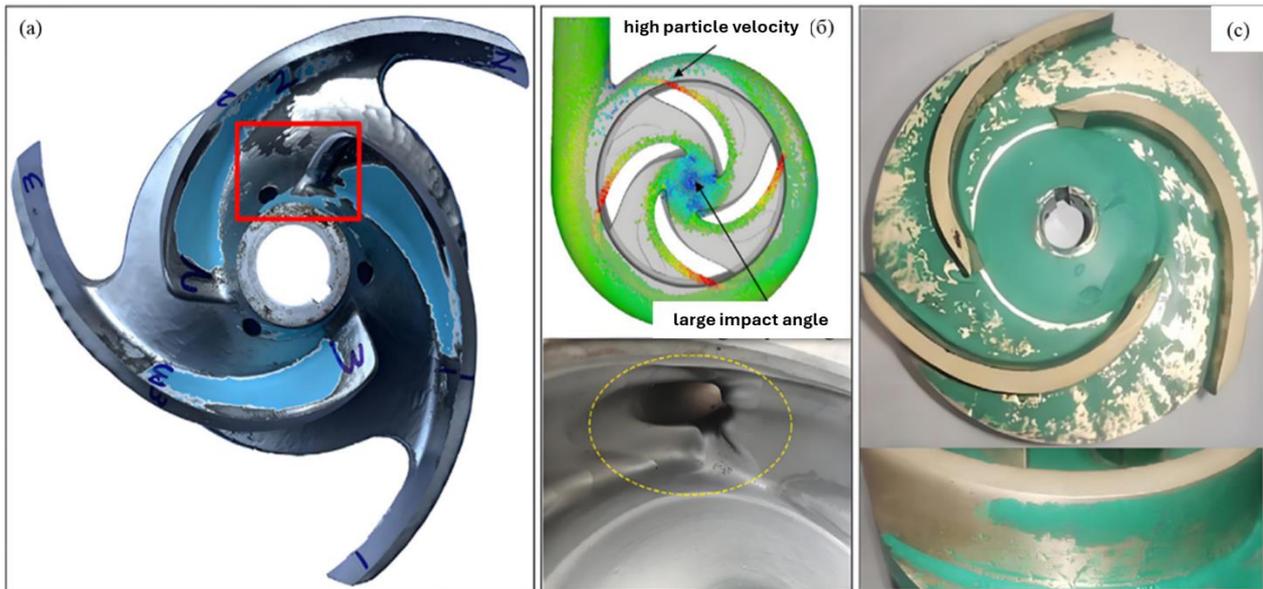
Distribution of wear on a slurry pump: a) front edge of the blade; b) spiral tongue; c) rear edge of the blade [\[11\]](#).
